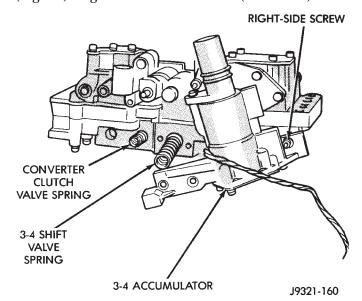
Converter Clutch And 3-4 Shift Valve Springs
